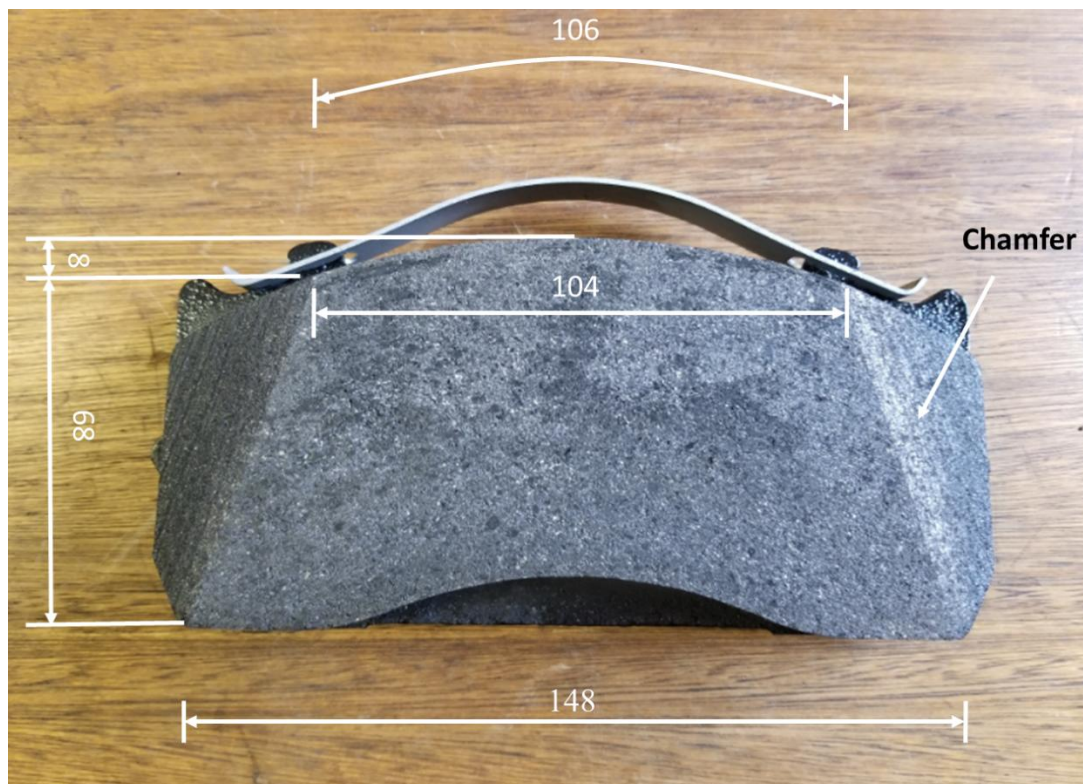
Dimensions of brake pads utilised for the experimental testing
